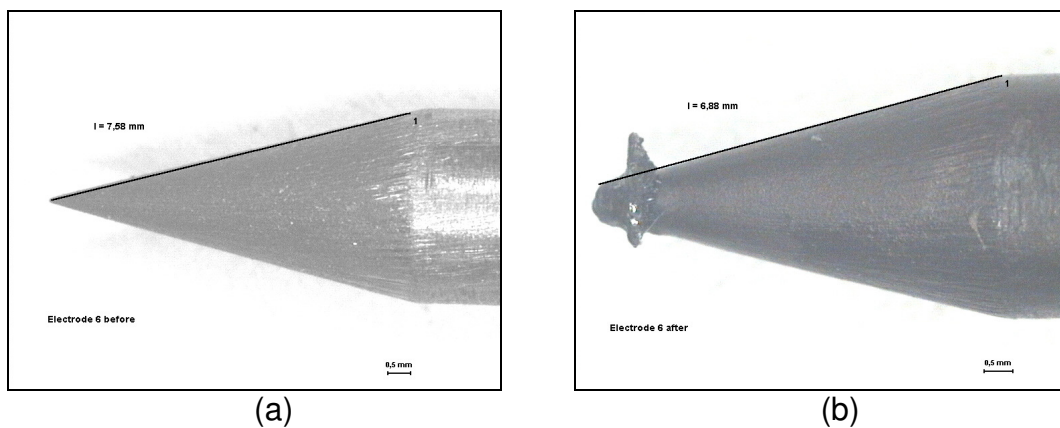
Electrode 6 used for experiment number 6: (a) before welding; (b) after welding.
